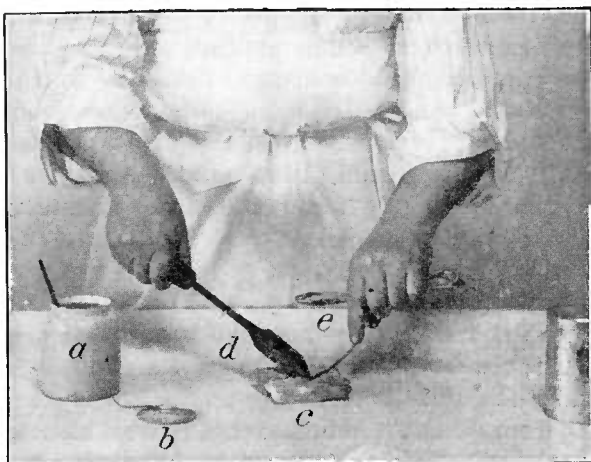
Tinning the tipping copper (or soldering iron): *a*, Flux jar and brush; *b*, solder-hemmed cap; *c*, bar sal ammoniac; *d*, tipping copper or soldering iron; *e*, wire solder.
